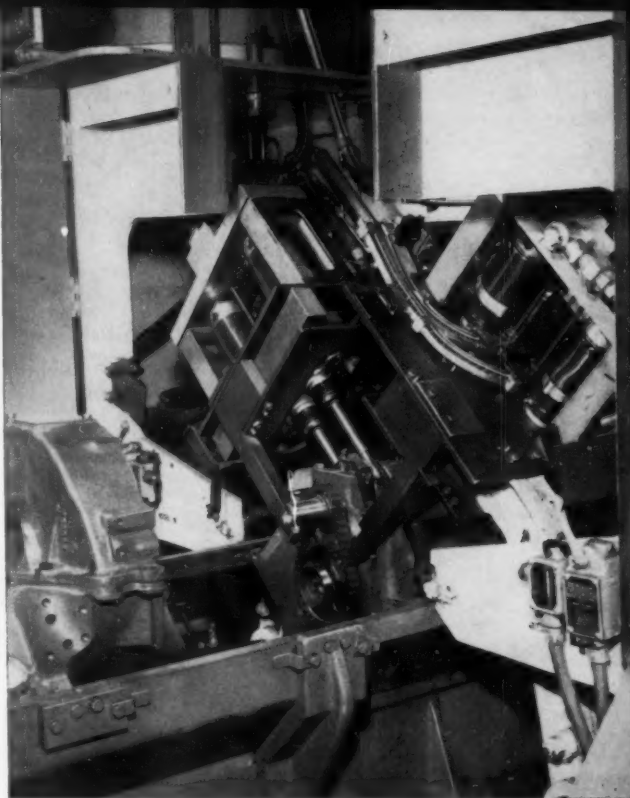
Close-up view of camshaft assembly machine (Fig. 1) prior to installation in the line. Shafts are lowered by chain carrying mechanism onto V-blocks, which raise the blocks to proper height.
